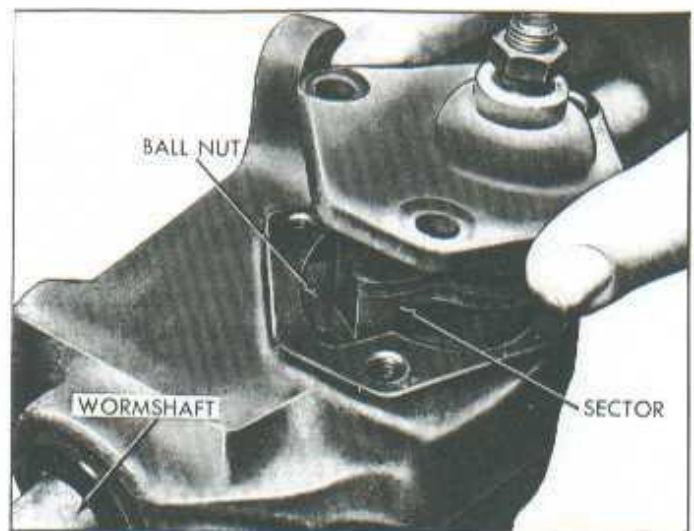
B-5--Removing Pitman Shaft Assembly--Typical
